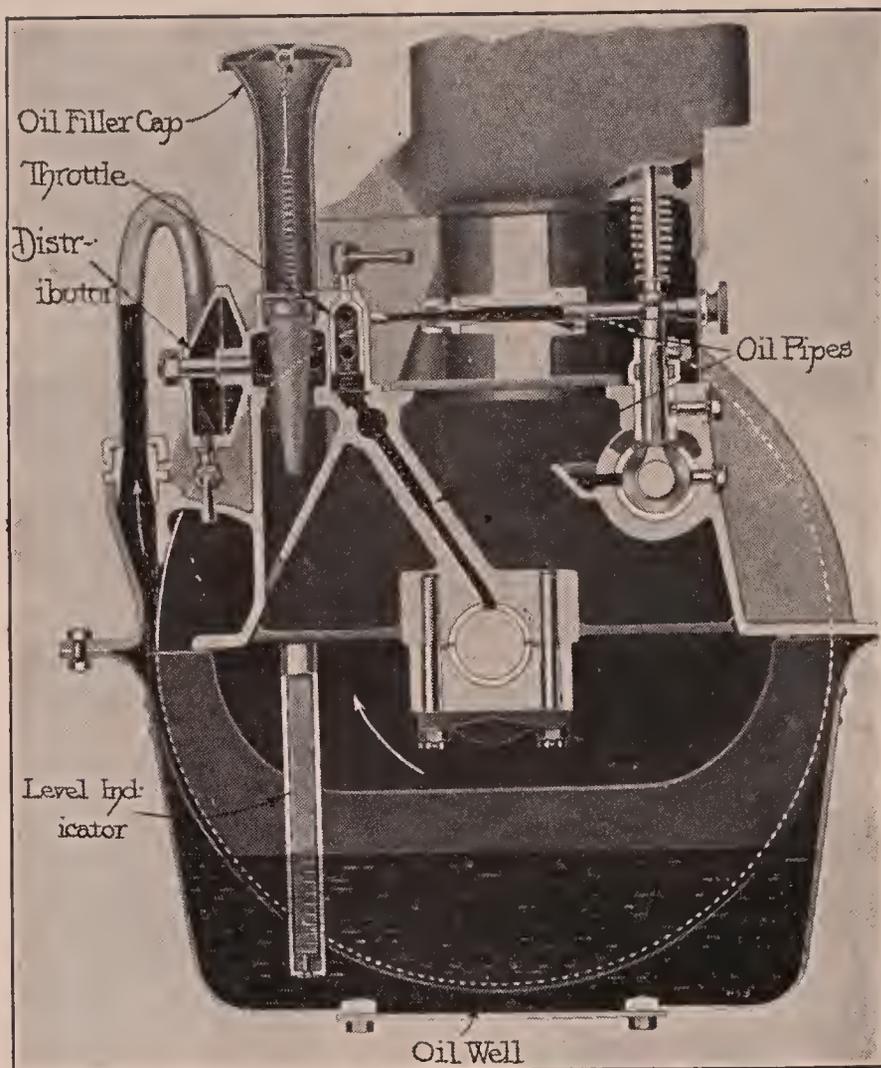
End View of the System Shown in Fig. 99, Showing the Distributor and Throttle, Unique Features of This Arrangement.
